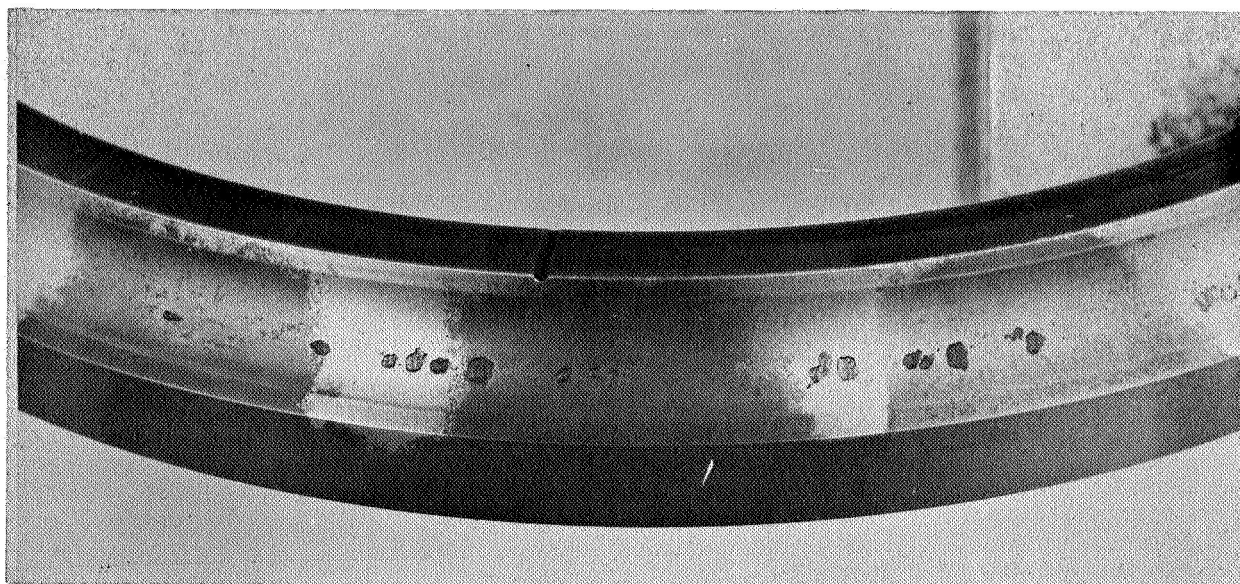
TYPICAL FAILURES ON BALL PATH OF INNER RING - BEARING S/N 40
